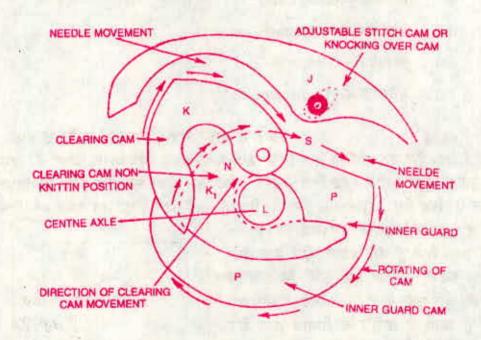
Dial cam set of Hand Driven Socks knitting machine.
